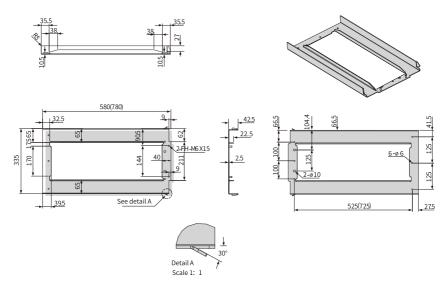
Dimensions of the bottom mounting bracket for T11 models
